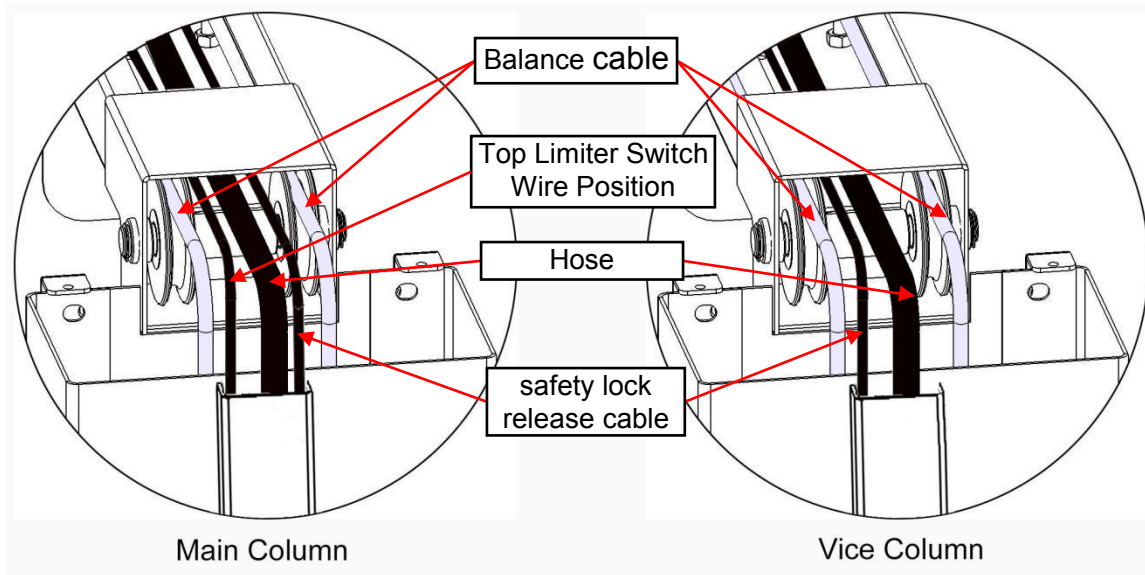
Safety Lock Release Cable & Hose & Top Limiter Switch Wire Position
